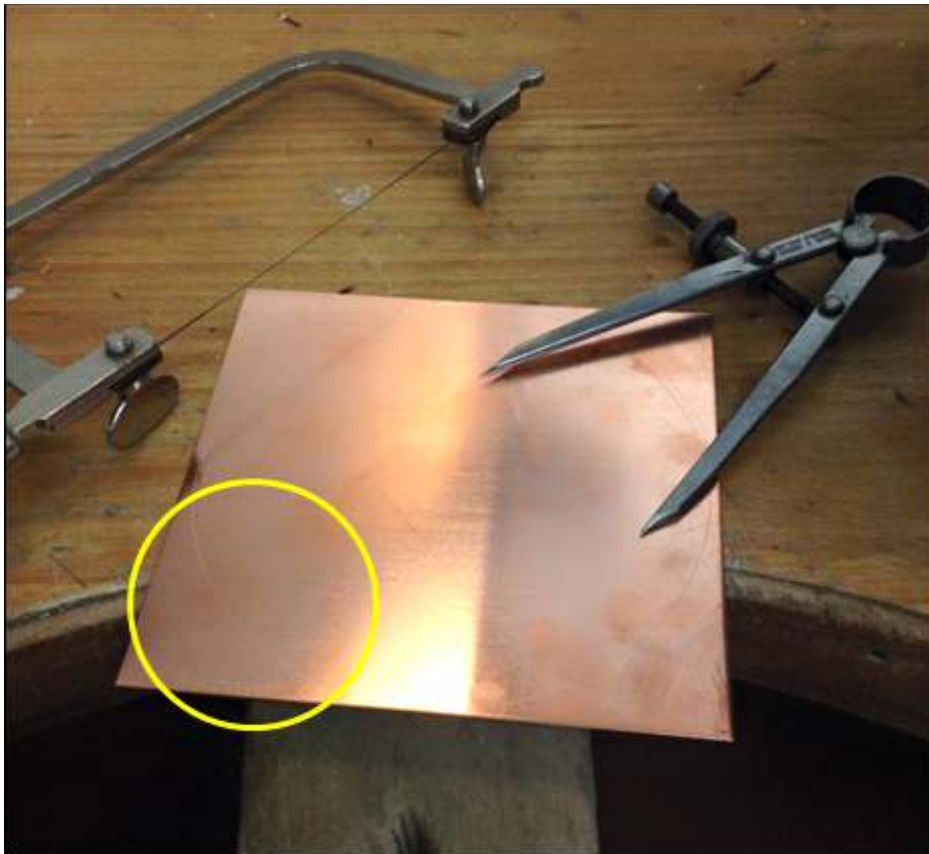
Tools for Layout of Design – Compass and Divider Used for Etching the Measurements of Design on Metal Sheet
